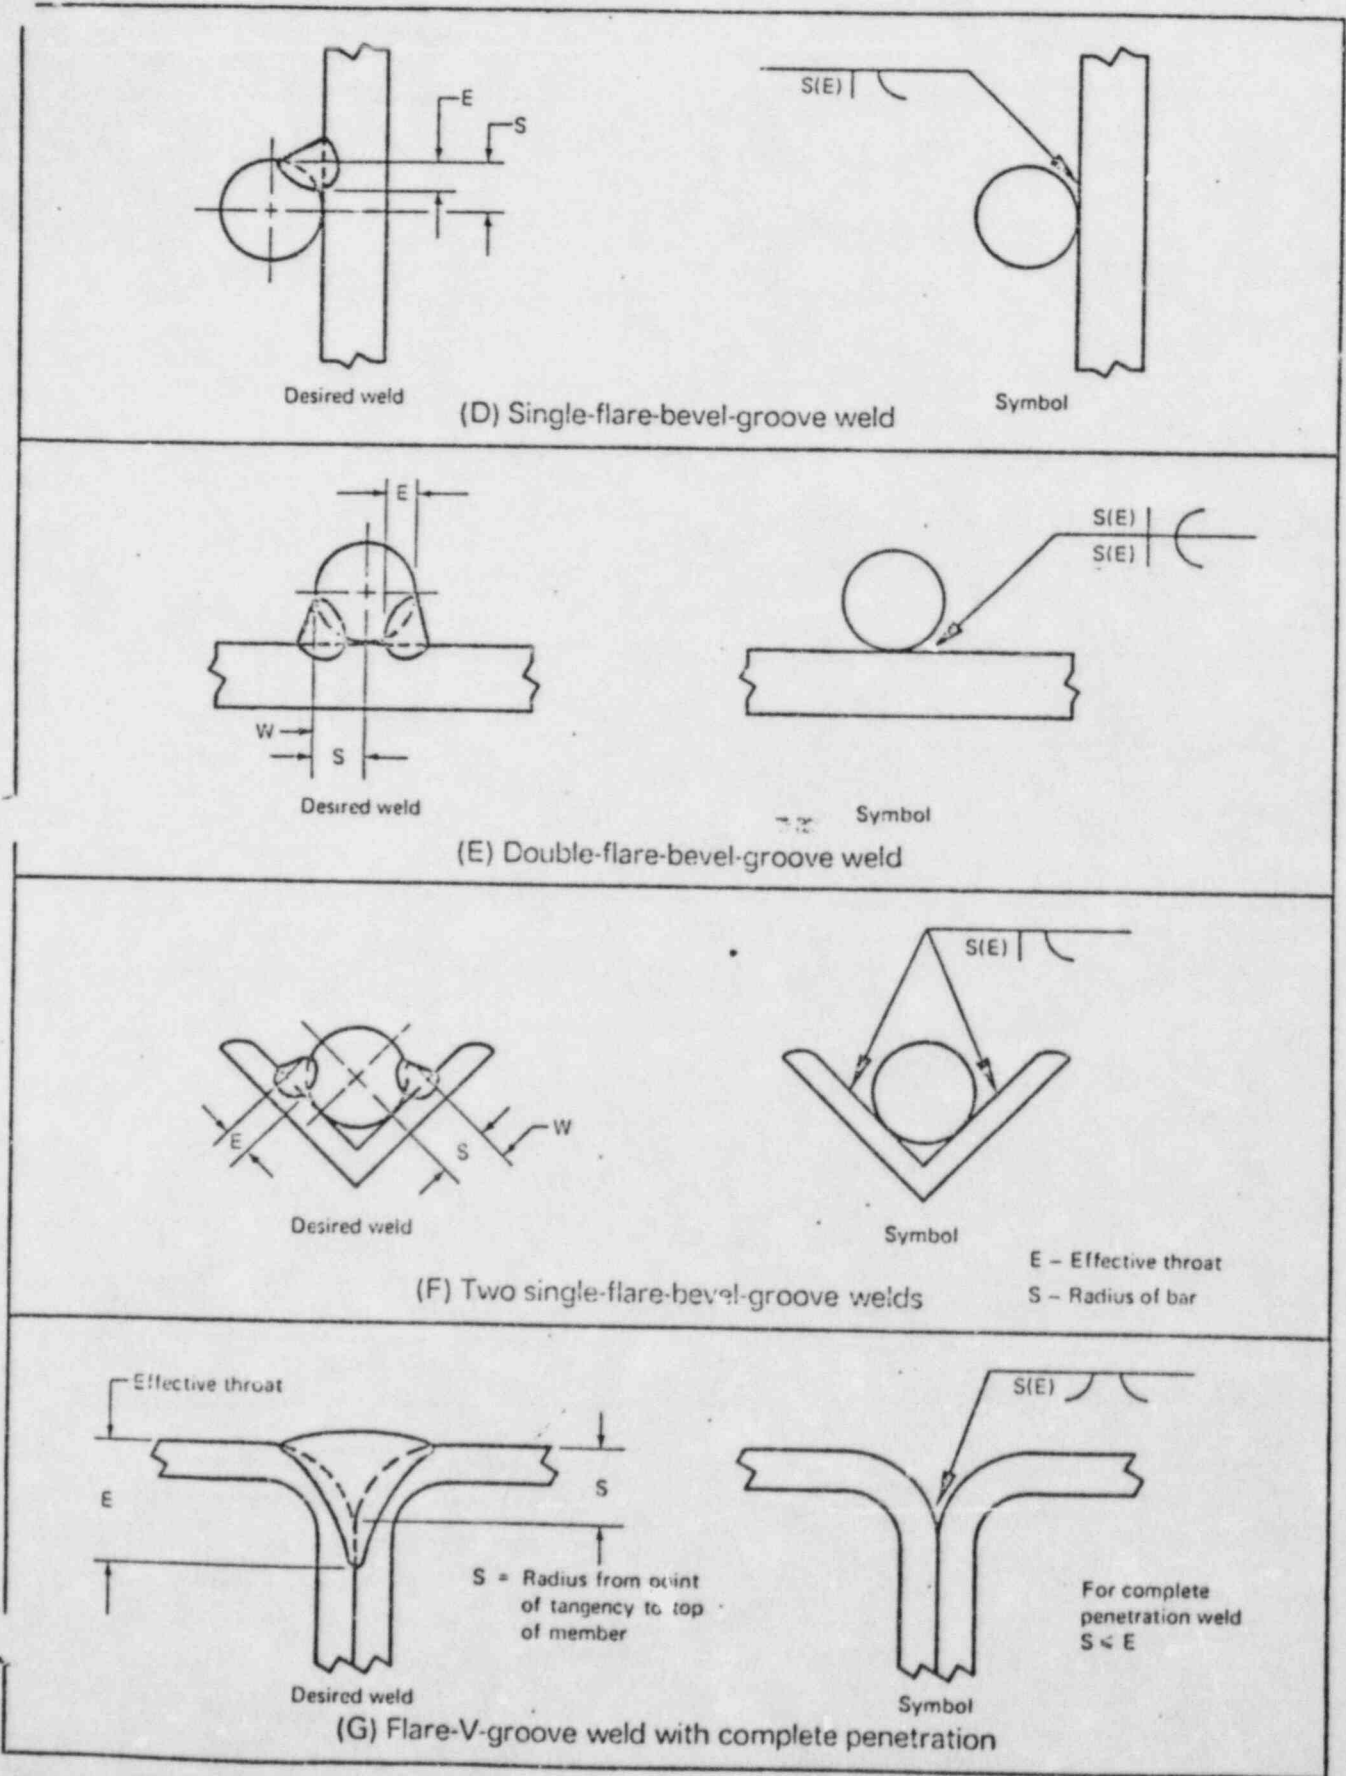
(cont.)—Application of flare-bevel- and flare-V-groove weld symbols
